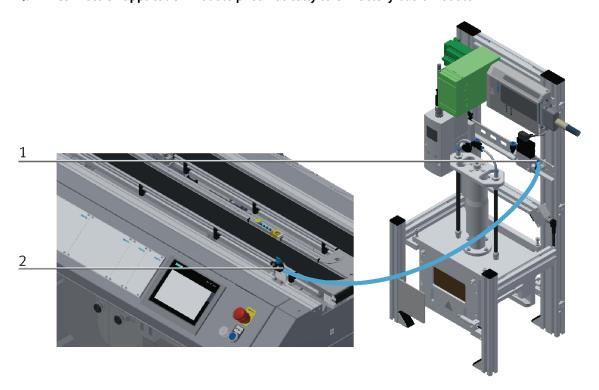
Connect CP application module pneumatically / Similar to illustration
